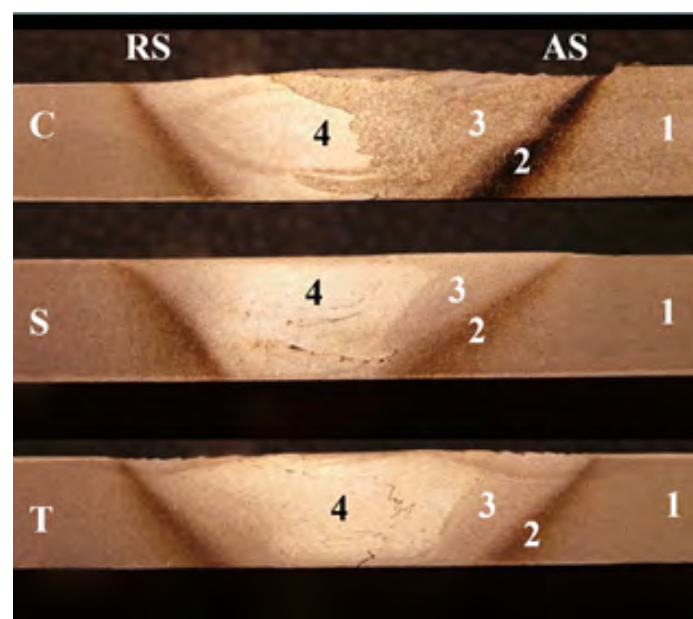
Cross-sections of 8 mm-thick one-sided butt-welded FSW joints of EN AW 6082-T6 alloy were obtained by three types of tools
